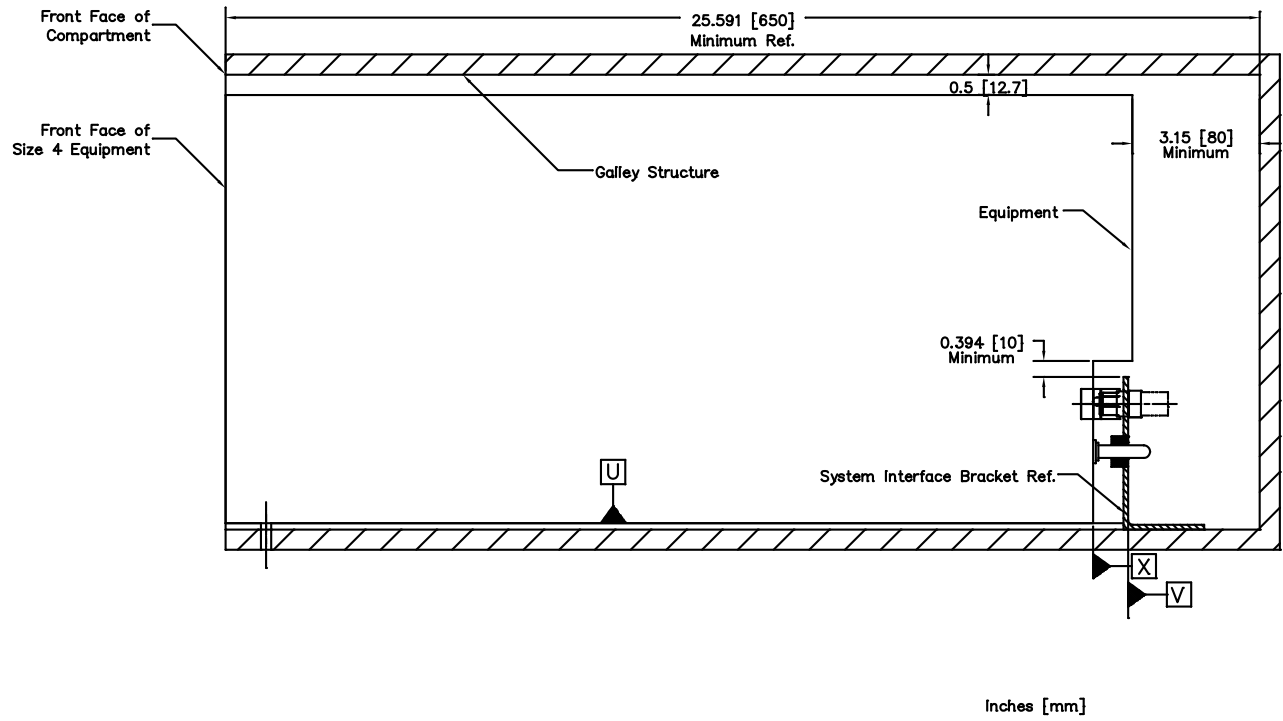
B – GAIN Size 4 Compartment and Equipment Installation Details
